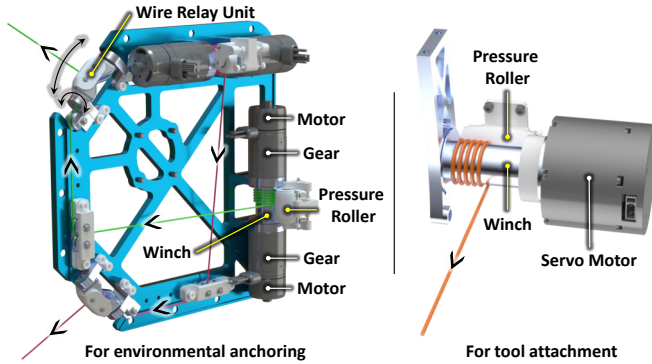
Overall structure of the two types of wire winding modules: one for environmental anchoring and one for tool attachment. A motor drives a winch to wind the wire.
